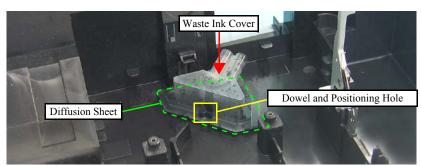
Removing the Waste Ink Cover and Diffusion Sheet
